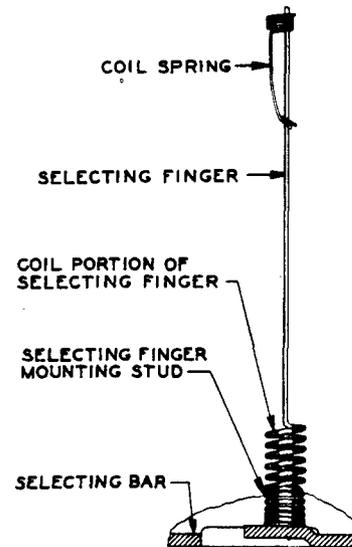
Method of Assembling Coil Spring of Selecting Finger
